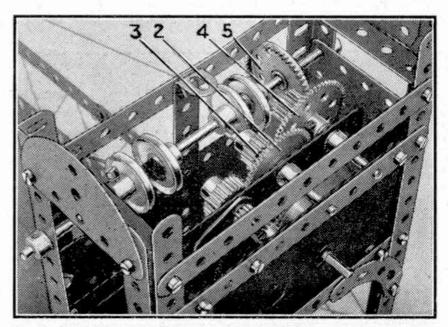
This illustration shows the assembly of the gearing and position of the driving Motor in the beam bridge.
